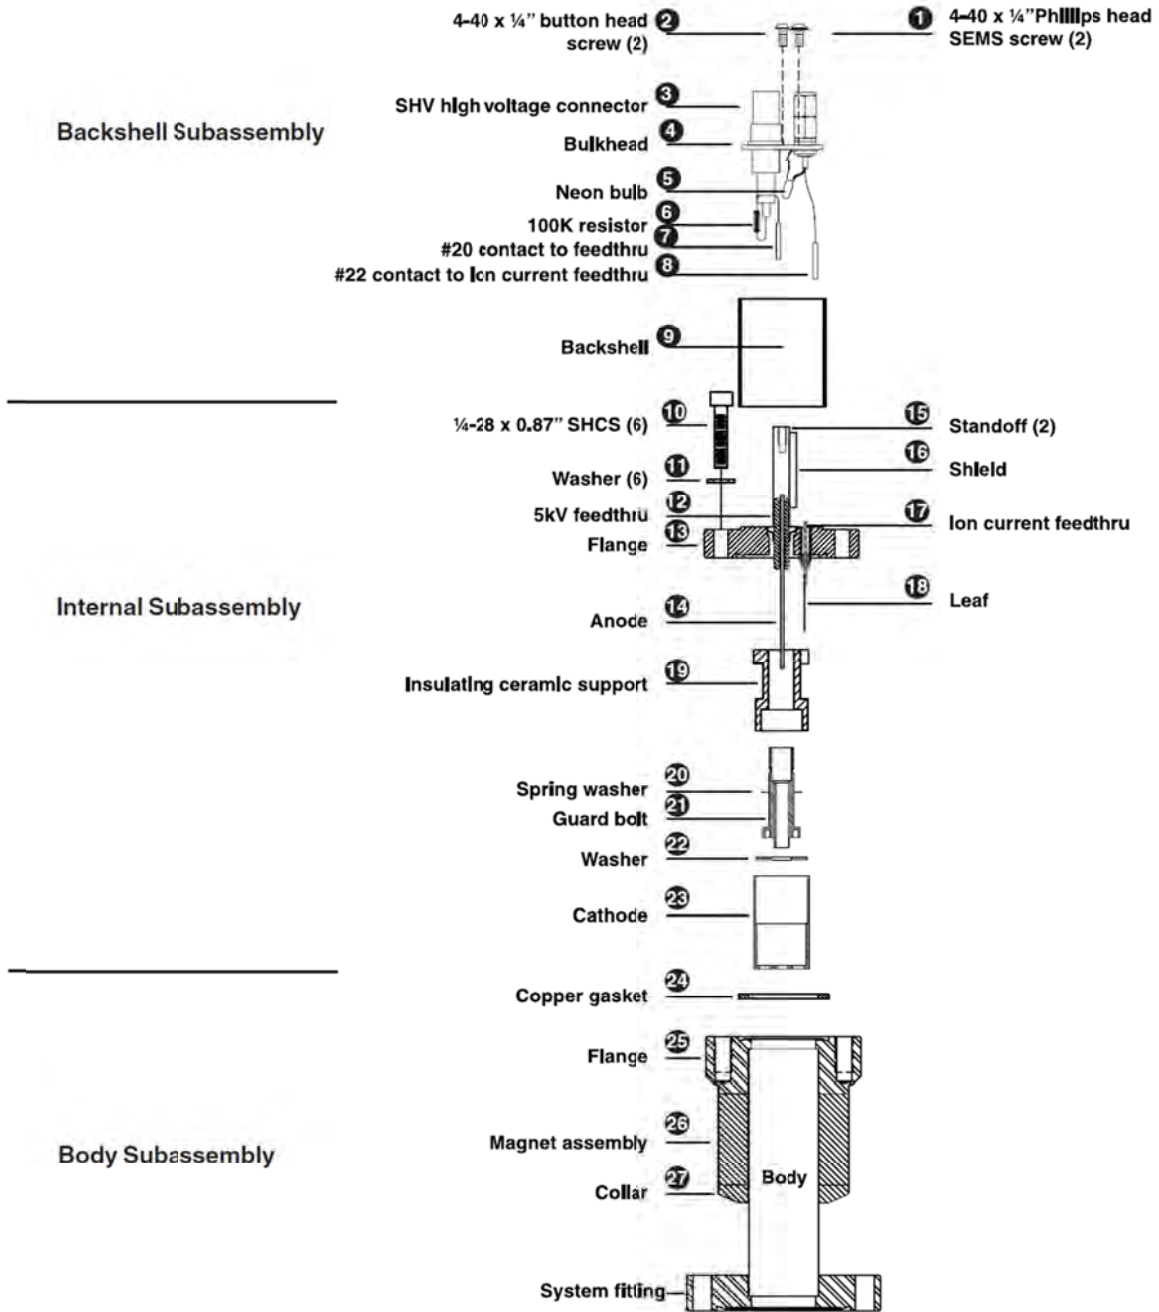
An exploded view of the 421/422 cold cathode gauge assembly.
